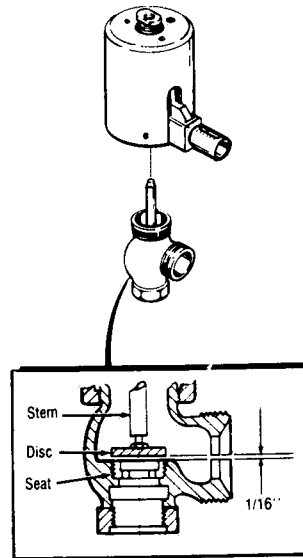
STEAM CONTROL VALVE ADJUSTMENT.
